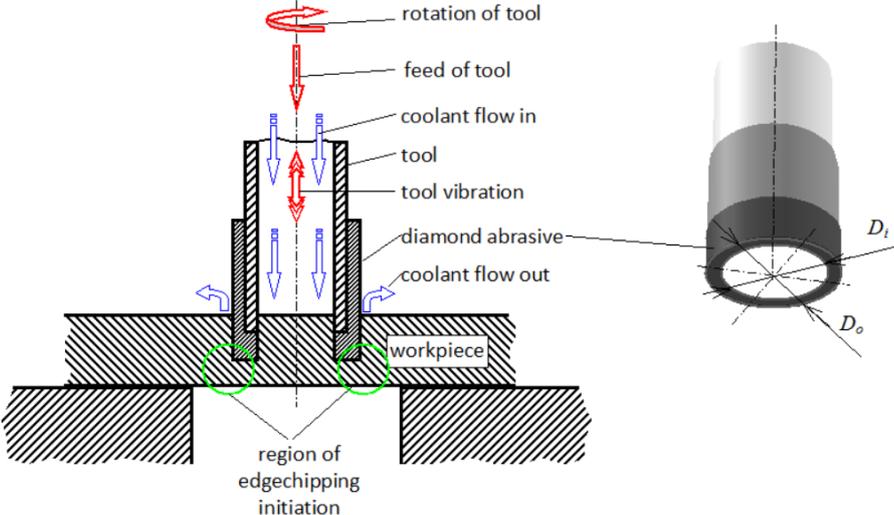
Fundamental principle of RUD using a tubular tool (2)
